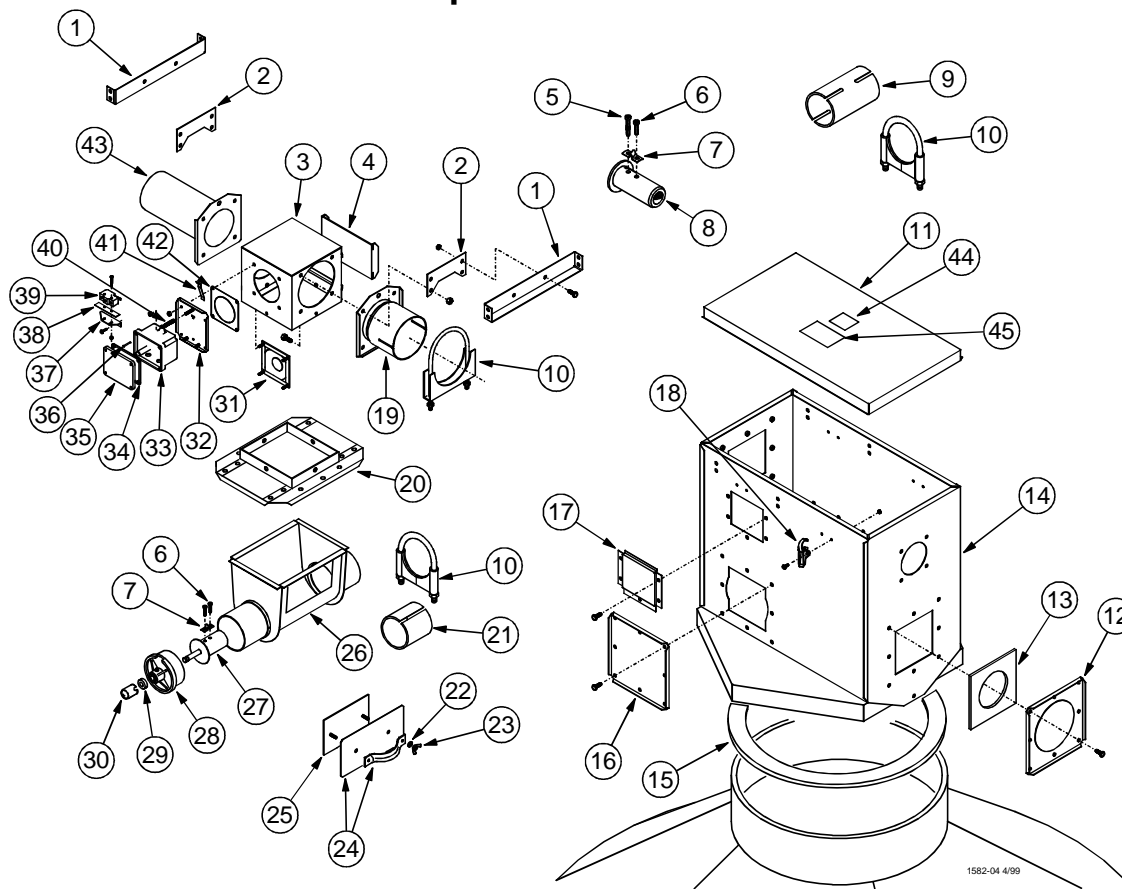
Assembling Control unit and Boot Assembly to Cover Weldment (inline assembly shown)
